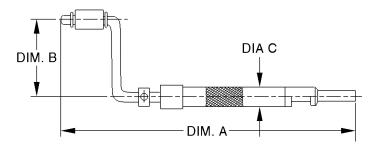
Tanged Insert Break-Off and Insert Extracting Tools
